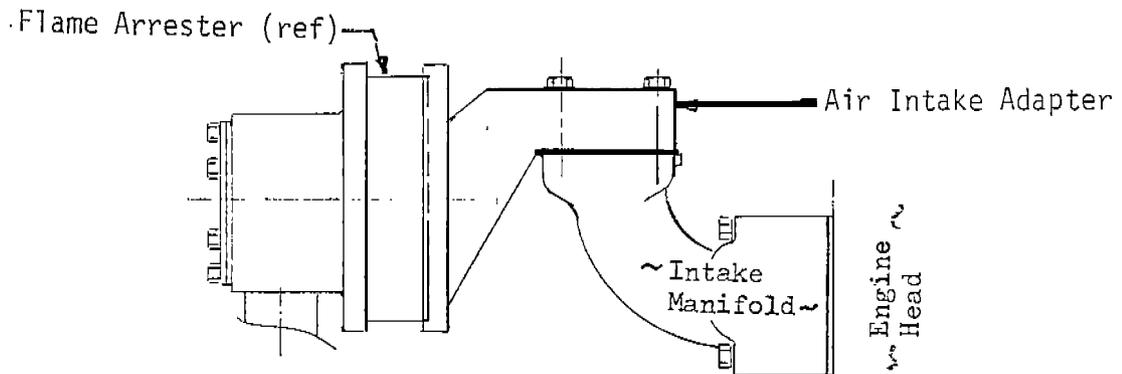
Gasket between Air Intake Adapter and Intake Manifold.
